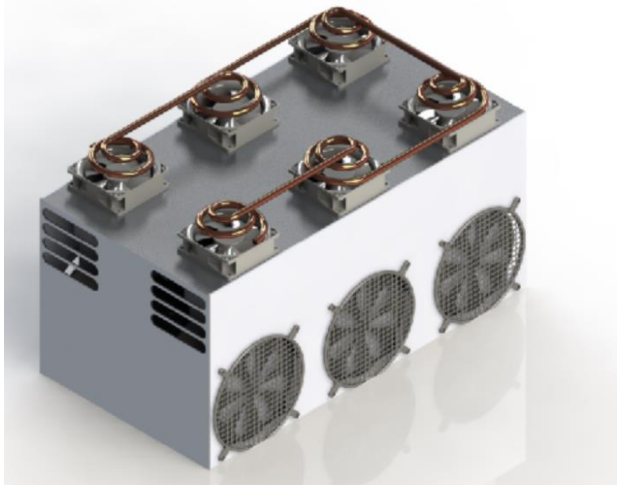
CAD-rendered drawing of the Compressors in Parallel
